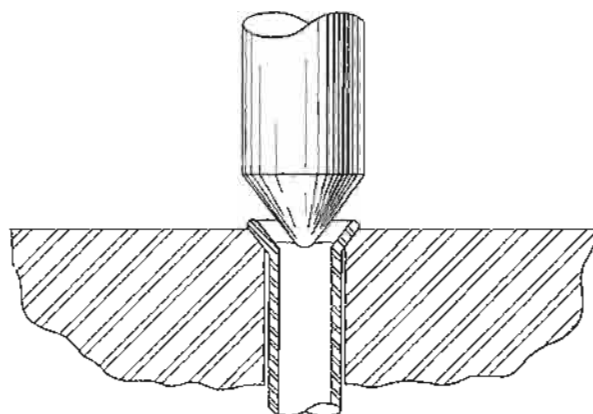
Schematic Drawing of Prechamfer Method of Tube-to-Header Joint Fabrication.
